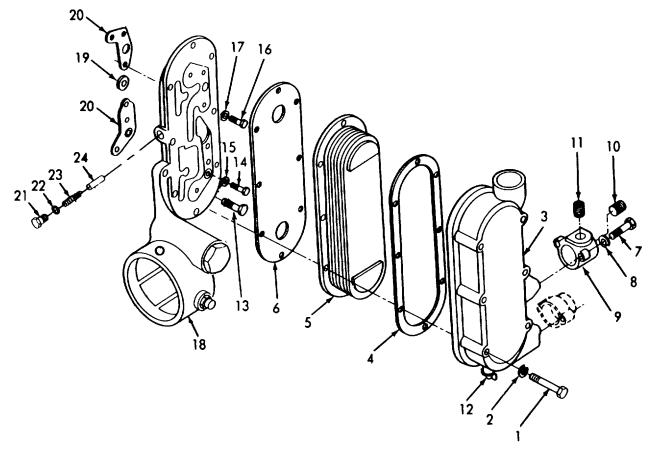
Lube Oil Cooler, Removal/Installation.
